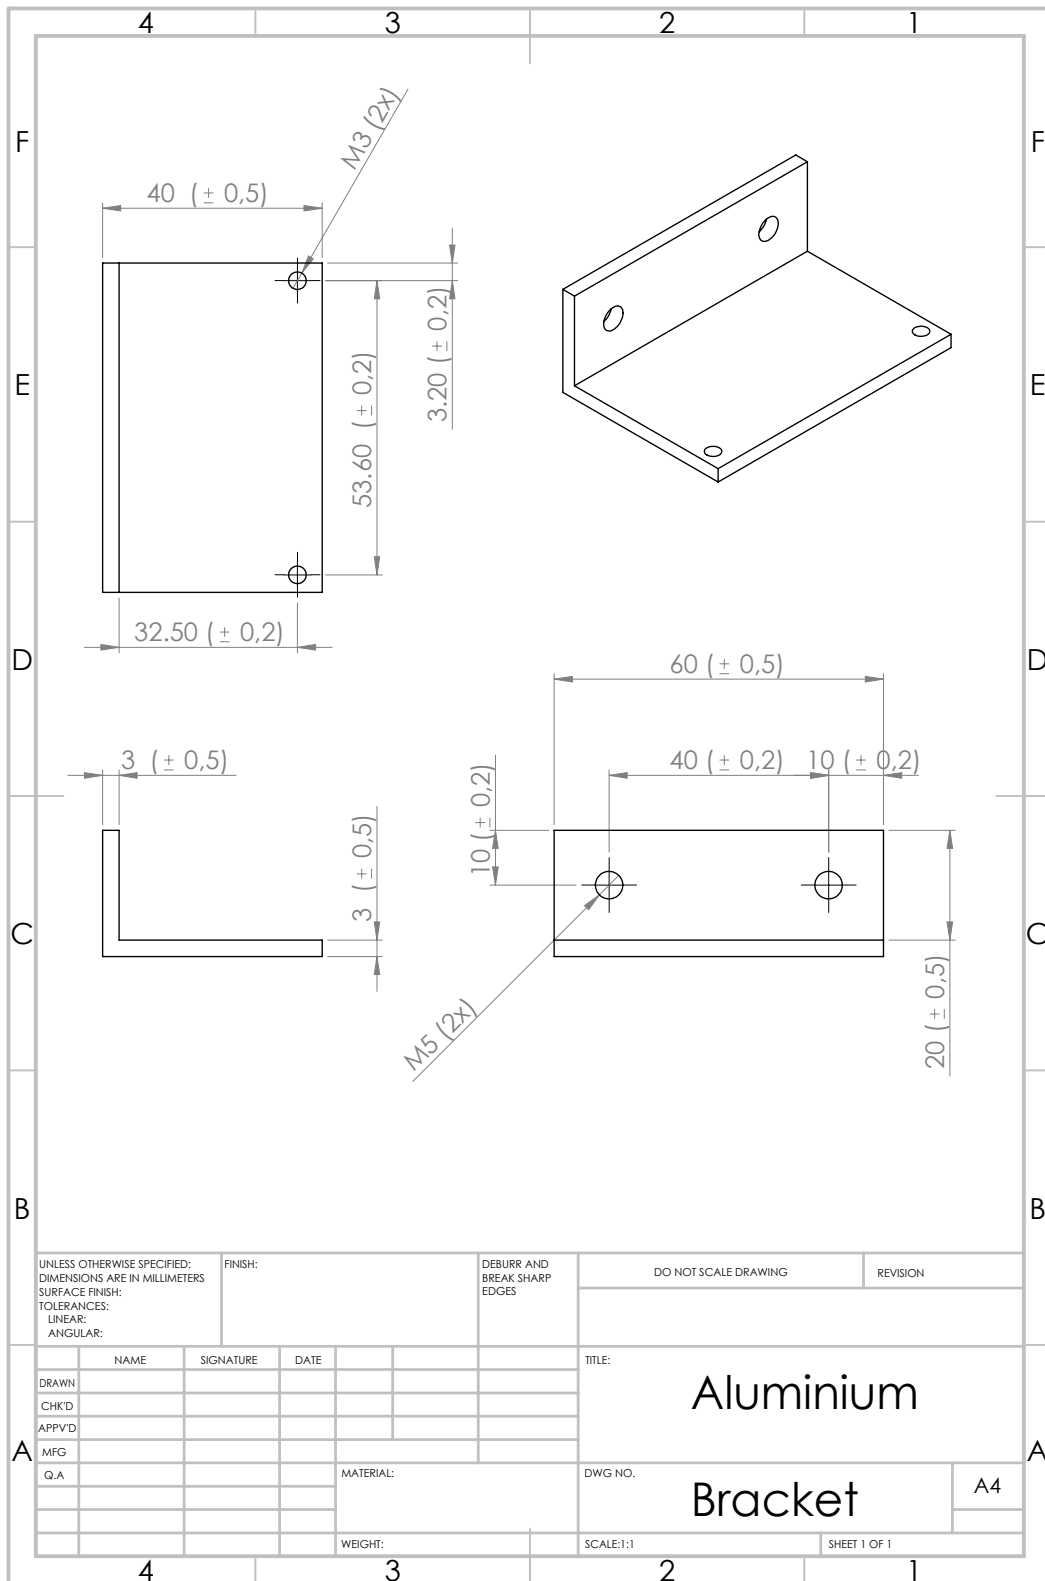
Bracket attached to the rema bracket to clamp the harvesting piezo.
